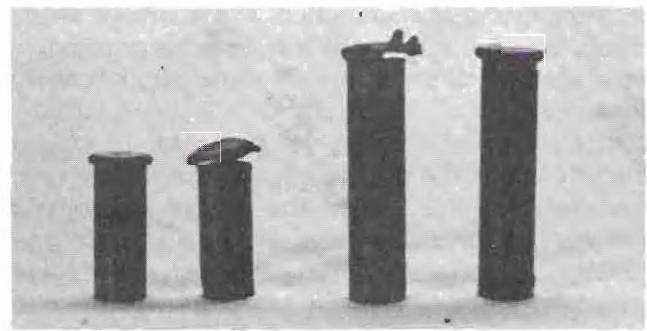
22 Rimfire Burst Case Heads Probably Caused by Mechanical Defect in the Firearm
